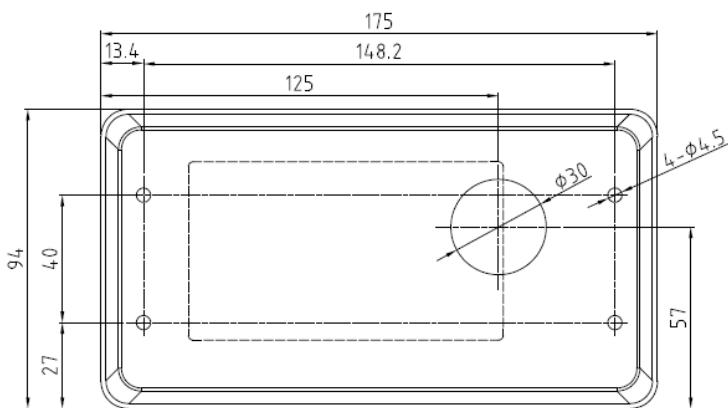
IND360 Panel Mount Cutout Dimensions (view from front of panel)
